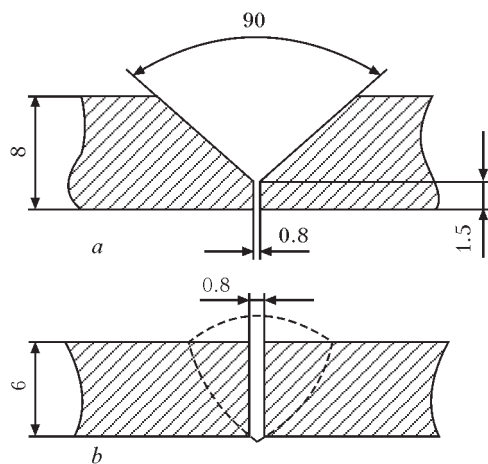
Scheme of edge preparation for TIG welding: *a* — one-sided welding with edge preparation and feeding of filler wire SP15sv; *b* — one-sided welding without edge preparation with feeding of filler wire VT1-00sv
